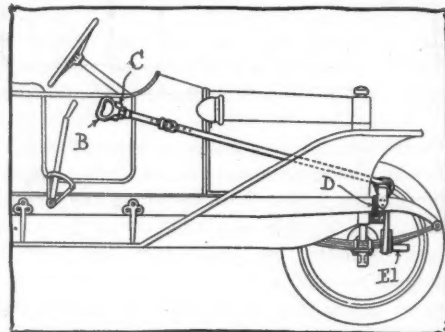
SIDE VIEW OF CAR SHOWING INSTALLATION OF PULL-MAN MOTOR STARTER
